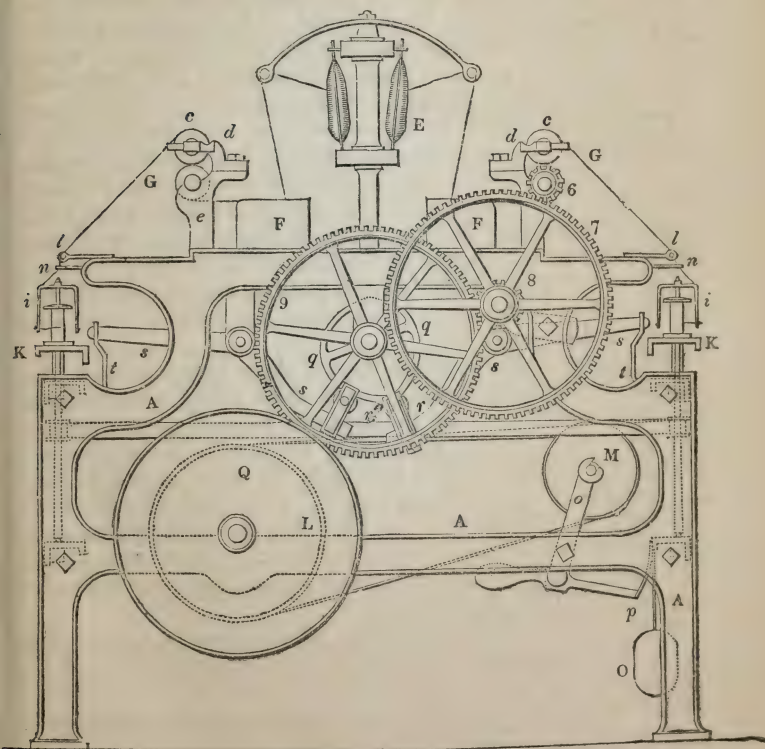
Doubling and Twisting Frame. End View. Scale, one inch to the foot.
